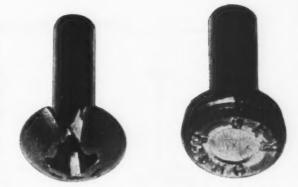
Example of forged heads exhibiting peripheral cracking. It can be seen that the forging operation offers a remarkably effective form of automatic inspection.
